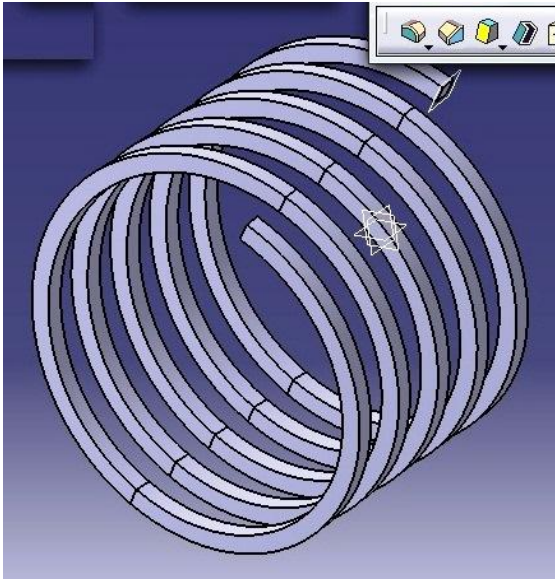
Coiled Insert (Square Cross-section) Solid Model
